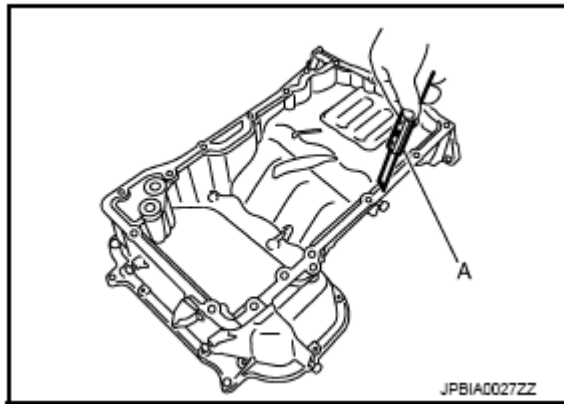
Removing Old Liquid Gasket From Mating Surfaces Using Scraper
